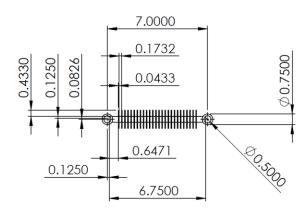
CAD drawing of the finned-tube sorber bed heat and mass exchanger (F-HMX), all dimensions are in inches
